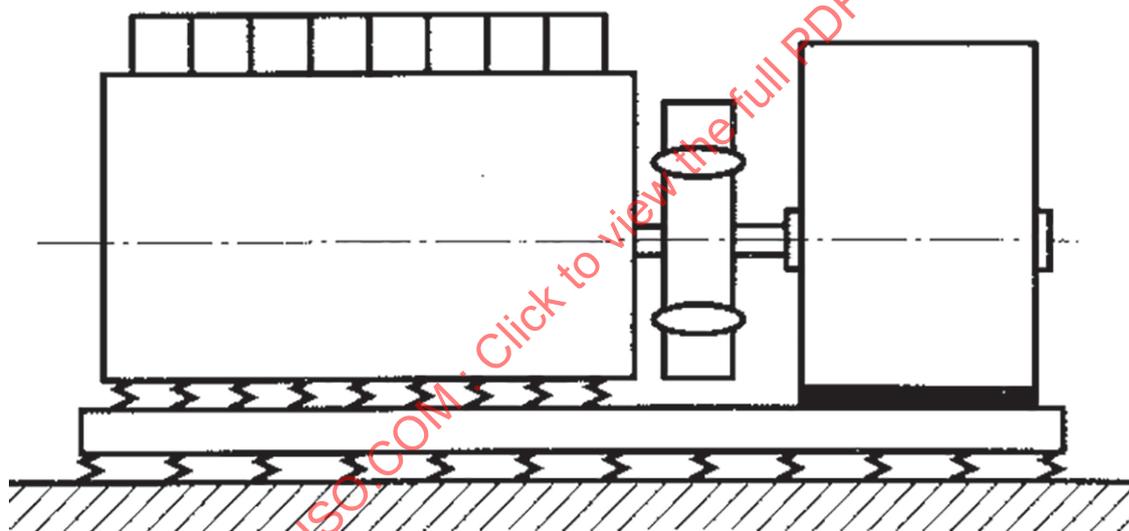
Engine resiliently mounted, generator rigidly mounted on resiliently mounted base frame, flexible coupling
